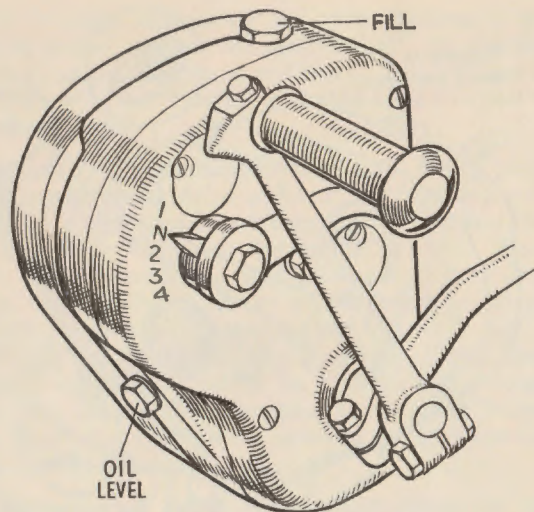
Showing oil filler and level plugs on gearbox (“Meteor Minor”).
